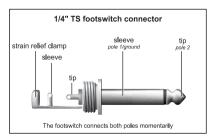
Wiring of a 1/4" TS connector for footswitch connection
